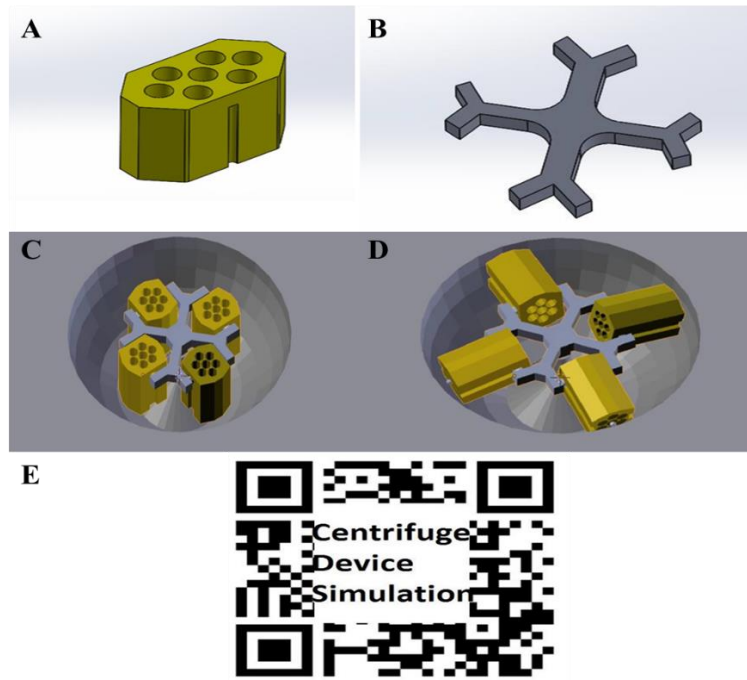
(A) Blocks/buckets to hold samples, (B) Rotator for holding blocks/buckets, (C) Combined blocks/buckets and rotator inside chamber, (D) Moving blocks/bucket while holding samples and (E), Centrifuge Machine Barcode.
